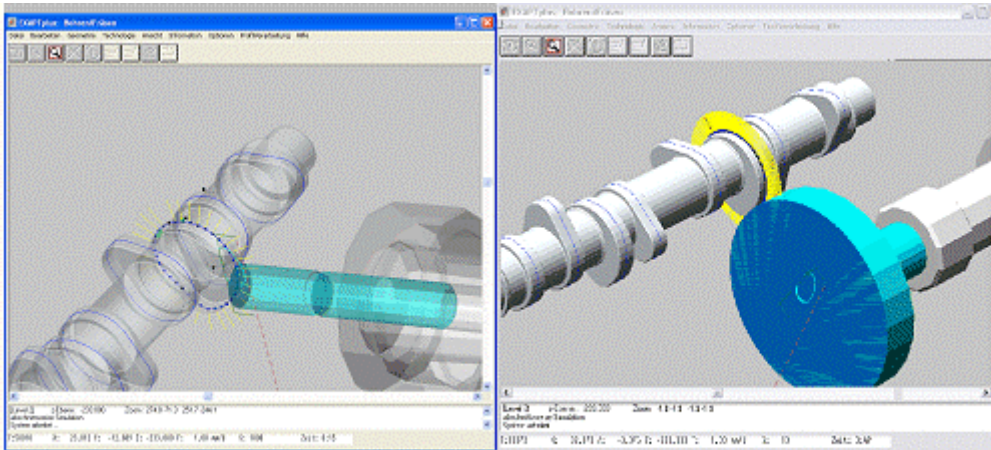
Alternative turn-milling of a camshaft (orthogonal and axis-parallel tool setting)
